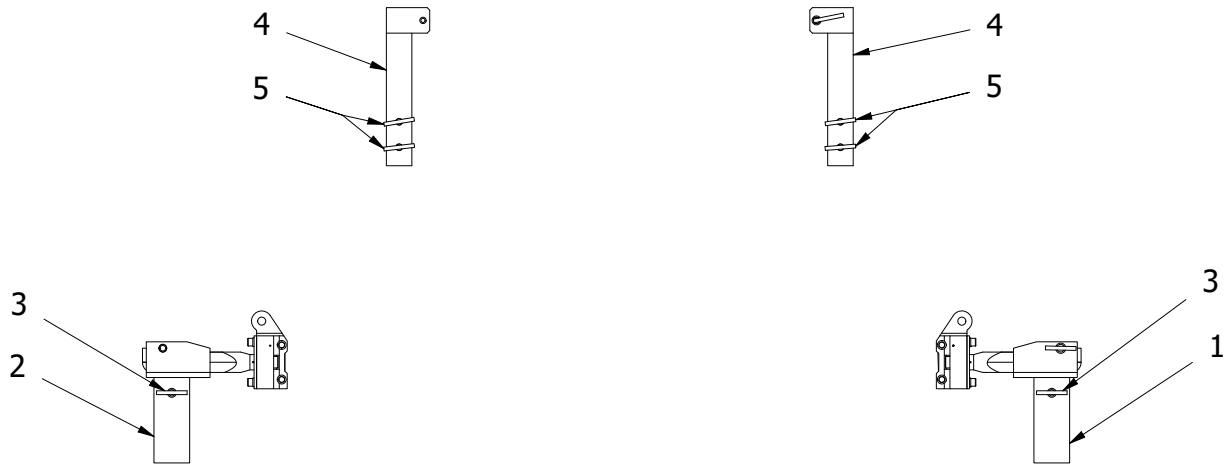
Engine Adapter Assembly (V2500-A1/-A5)
